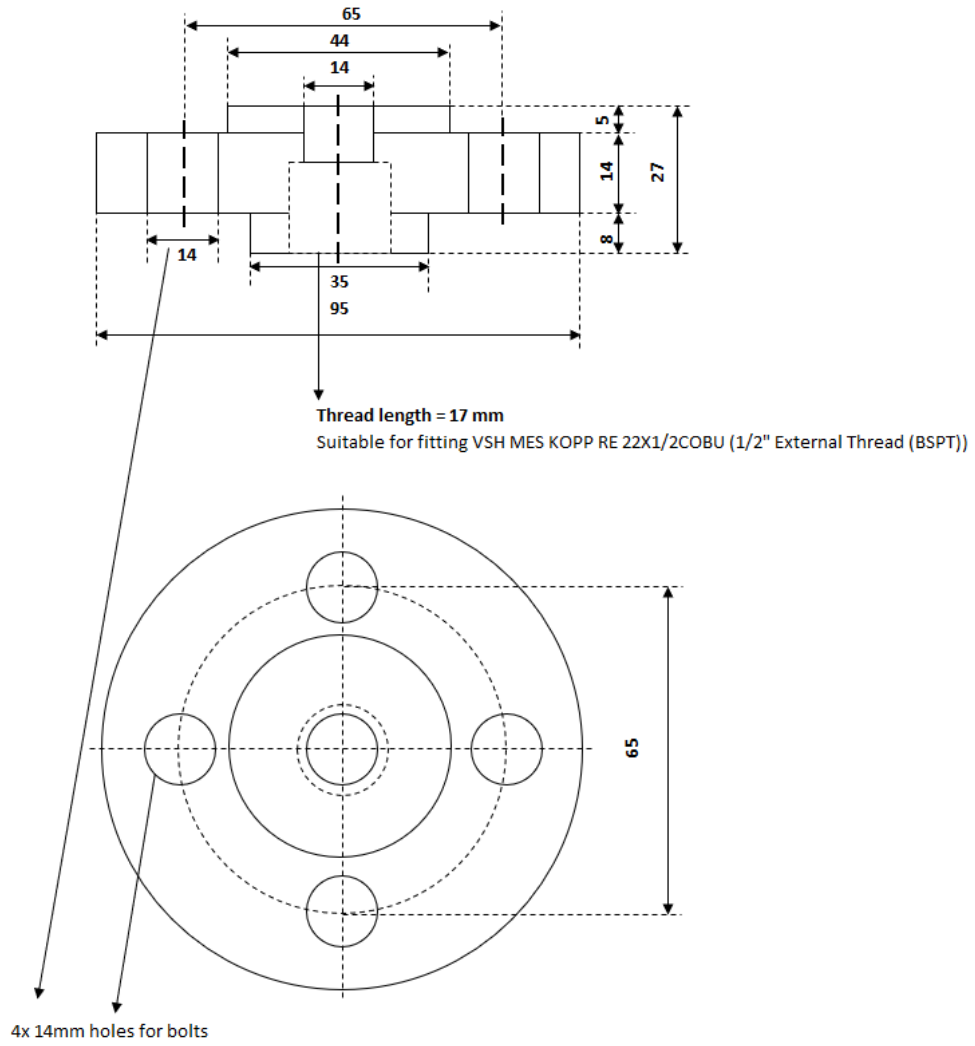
Dimensions of the flanges of the flowmeters (4 in total).
